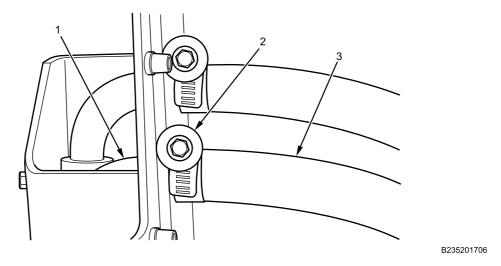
Heater Radiator Outlet Hose Inside LSS Box at Panel.
